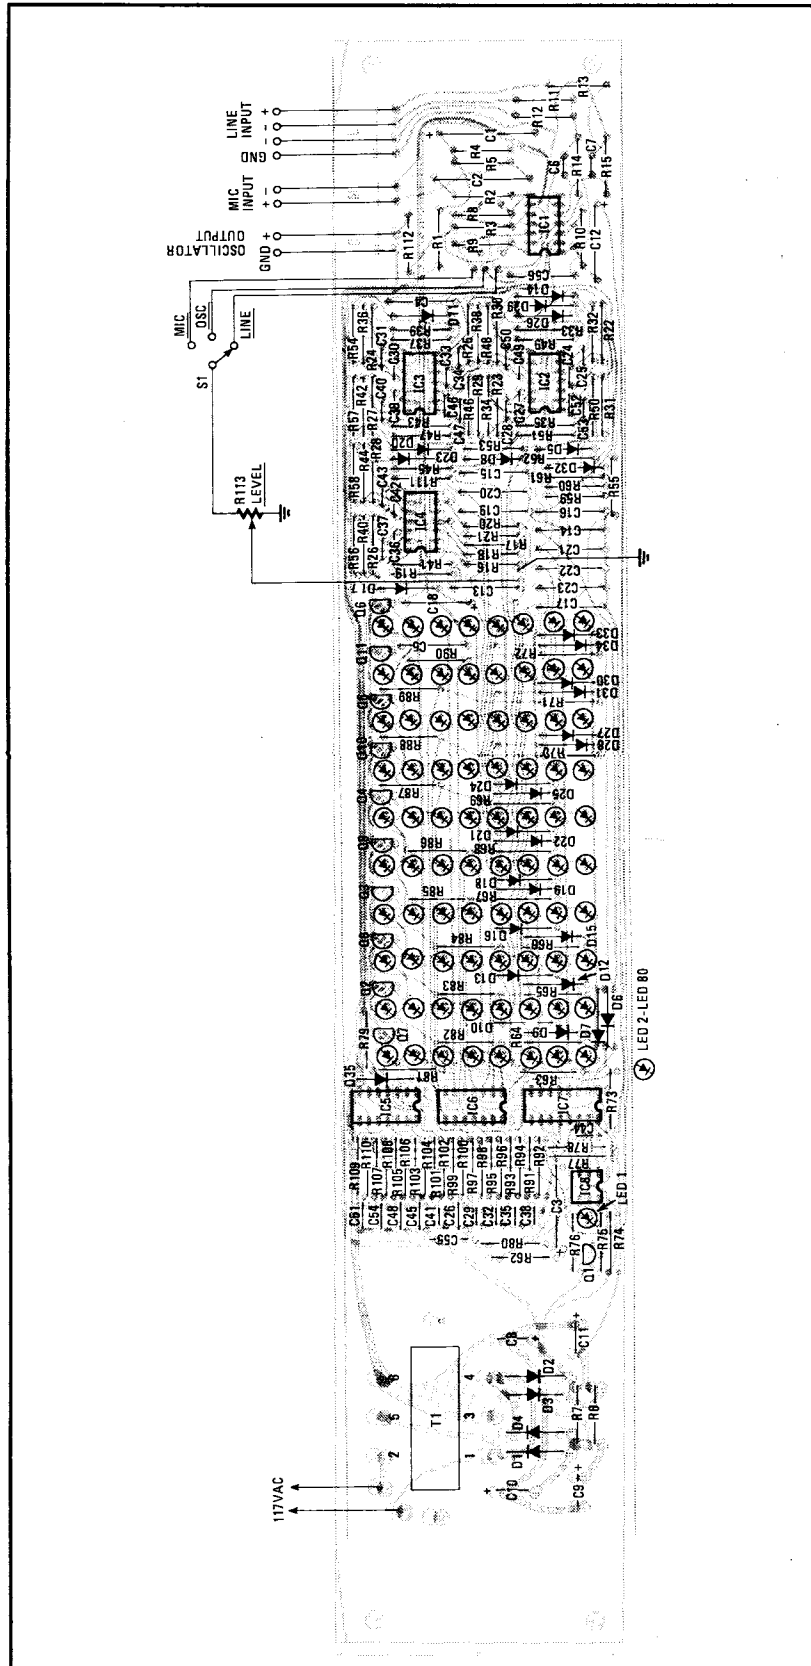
PARTS PLACEMENT DIAGRAM. Note that the LED's are mounted on the solder side of the board so they can be seen when it is mounted in a cabinet.
